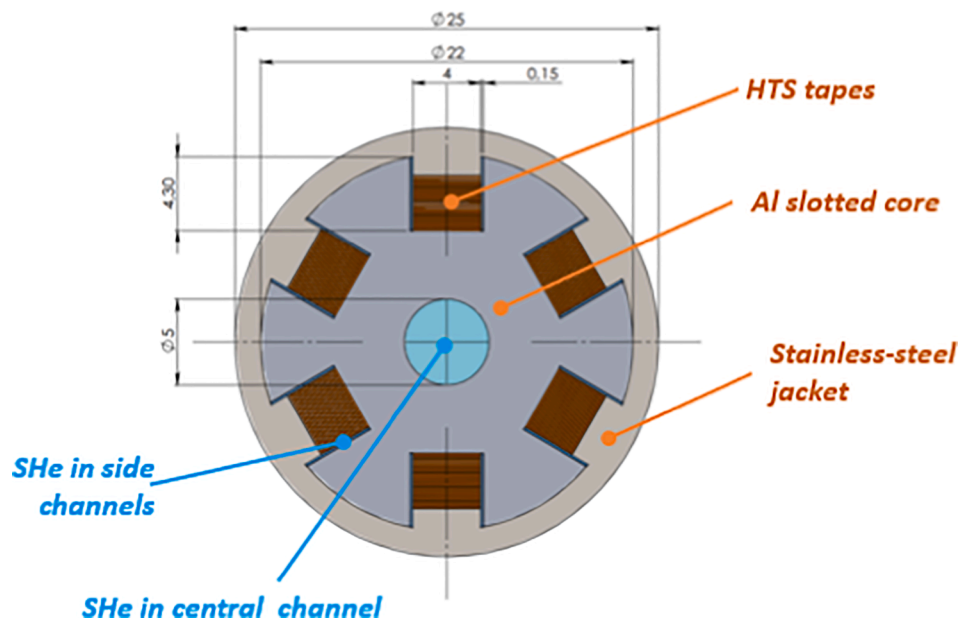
Layout of the Test 2 conductor, with geometrical details (in mm).
